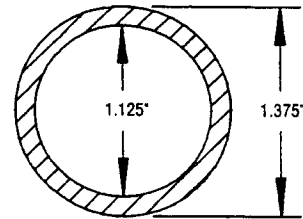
Soil Sampling Tools – Probe Drive System/Large Bore
